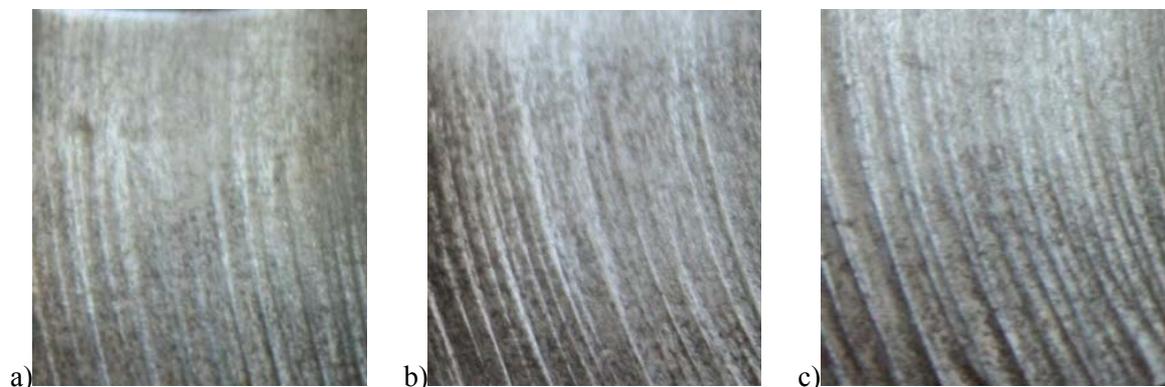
Photographs of holes surfaces after abrasive water jet cutting for cutting speeds of: a) 68,2 mm/min; b) 110,3 mm/min; c) 143,4 mm/min
